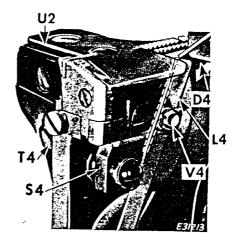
(Machine 246K44) Removal and Replacement of Stationary Knife
